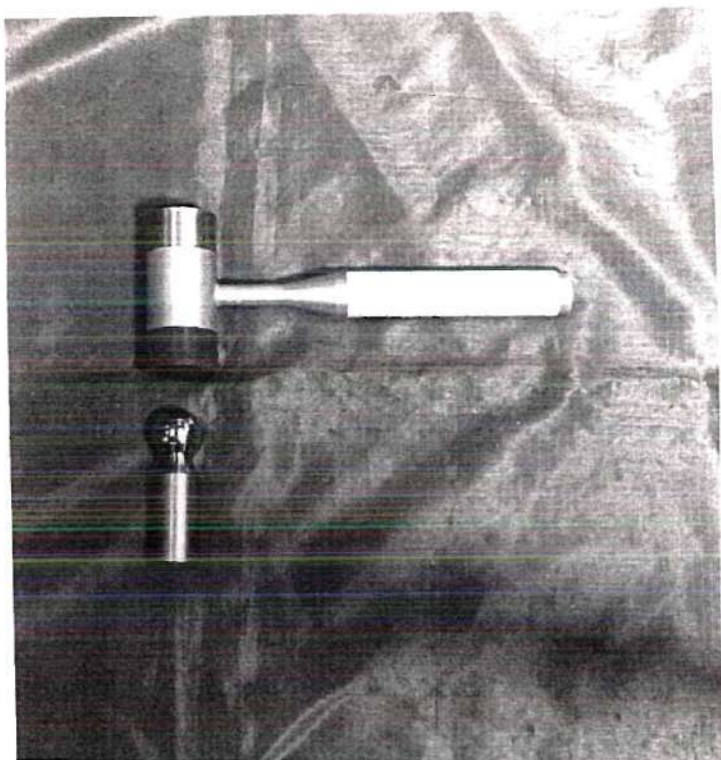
Head Assembly by direct impact strike and by striking a controlled impactor
